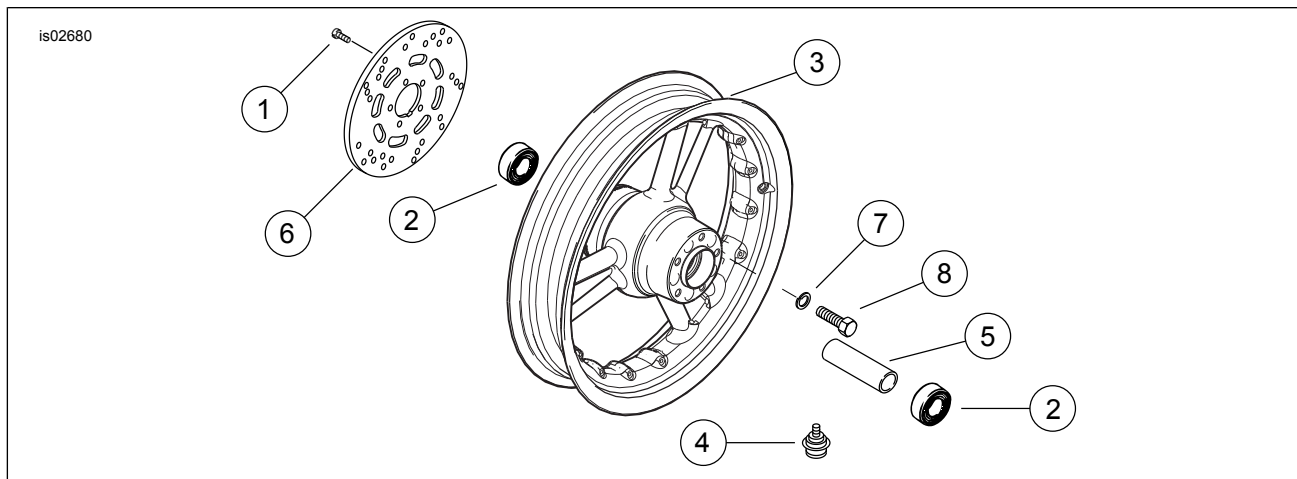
Service Parts: "Detonator" Custom Rear Wheel Kit
